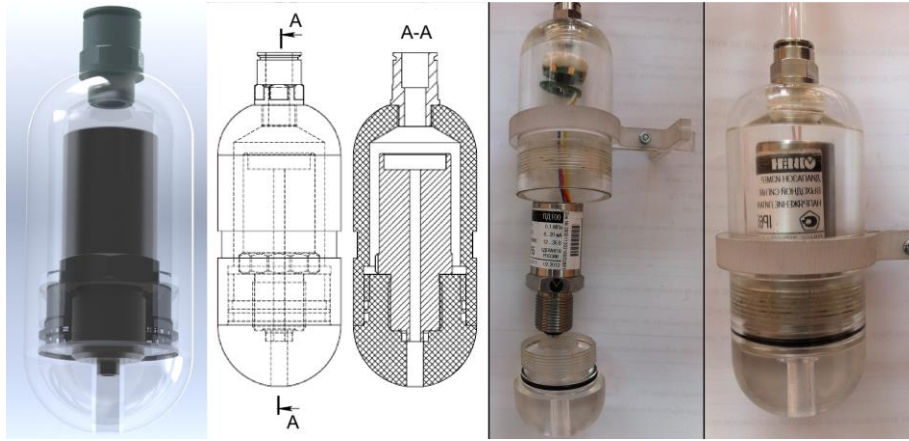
Depth sensor in the housing (CAD model, drawing and real assembly)
